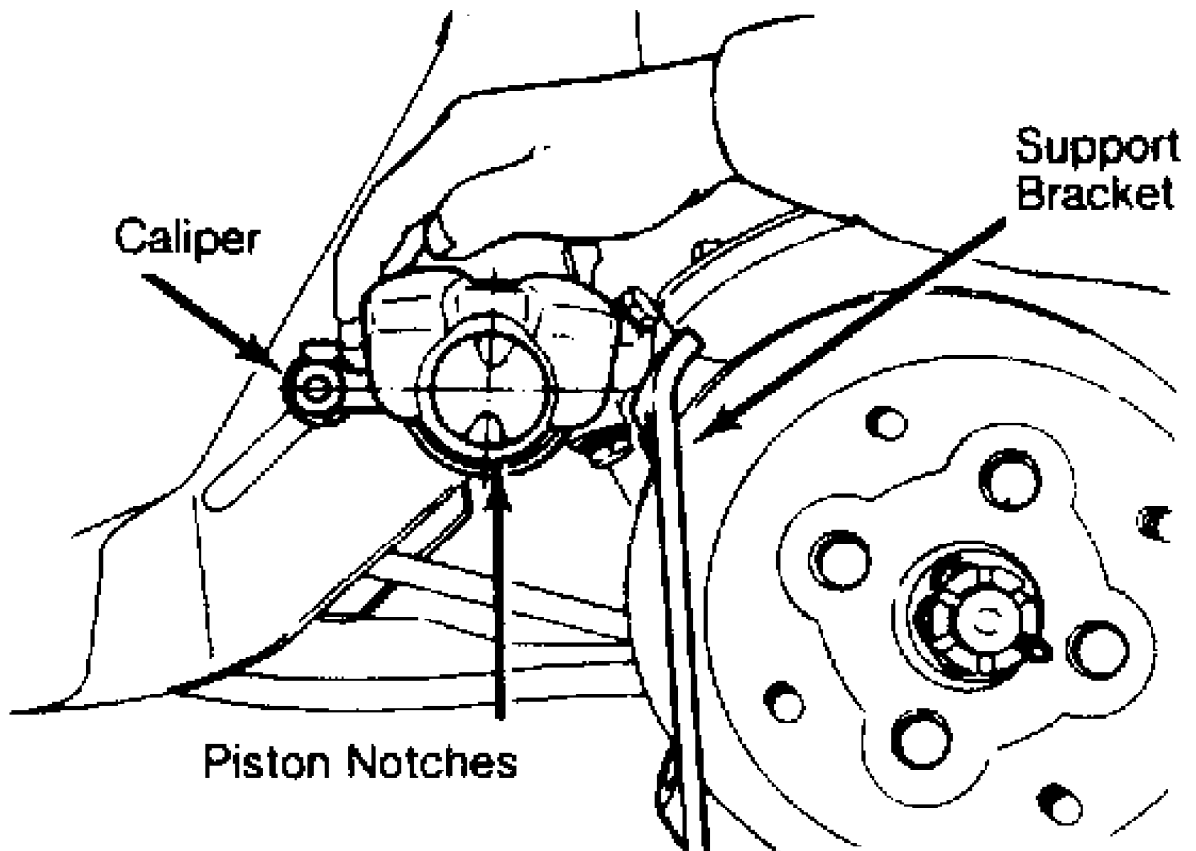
Aligning Caliper Piston Notches To Brake Pads (Loyale)
